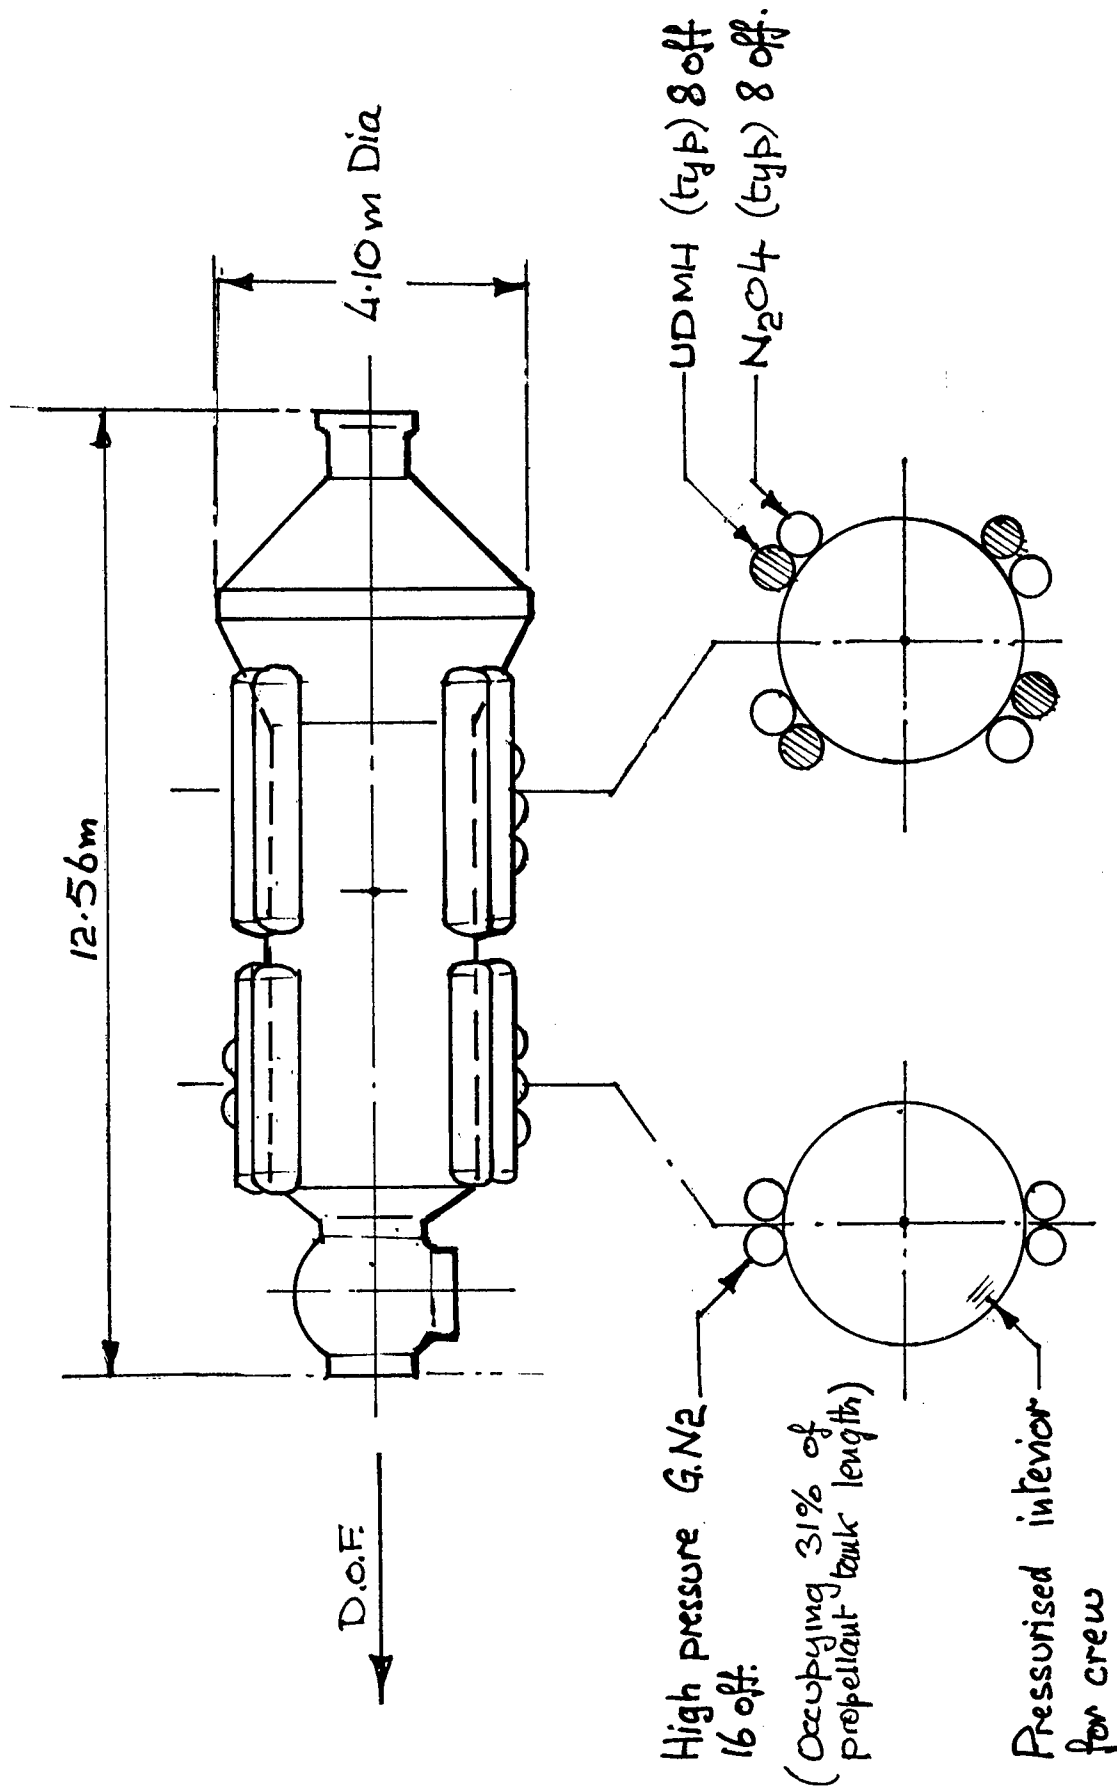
FGB GENERAL ARRANGEMENT.
